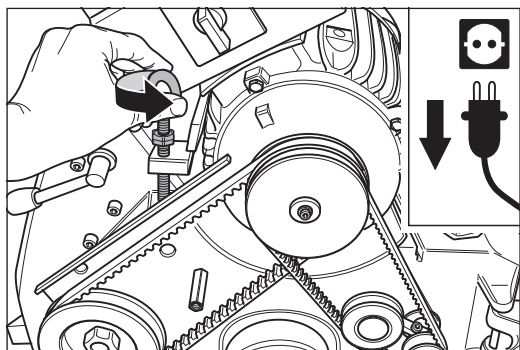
Release the V-belt tension by loosening the tensioning bolt at the motor.
